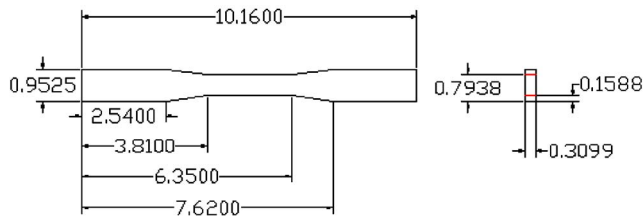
Dimensions (cm) of the ASTM fatigue dog-bone specimen
